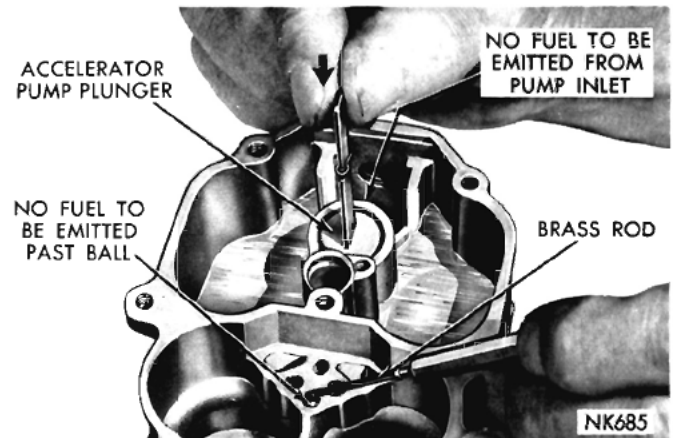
Testing Accelerator Pump Intake and Discharge Check Balls
